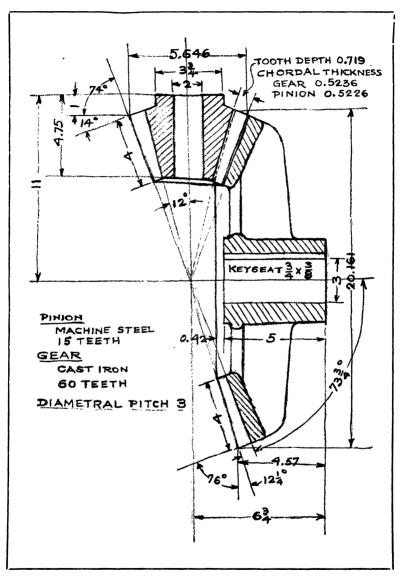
Sketch of Bevel Gear and Pinion with Dimensions Required in Machining the Gear Blanks and Cutting the Teeth
